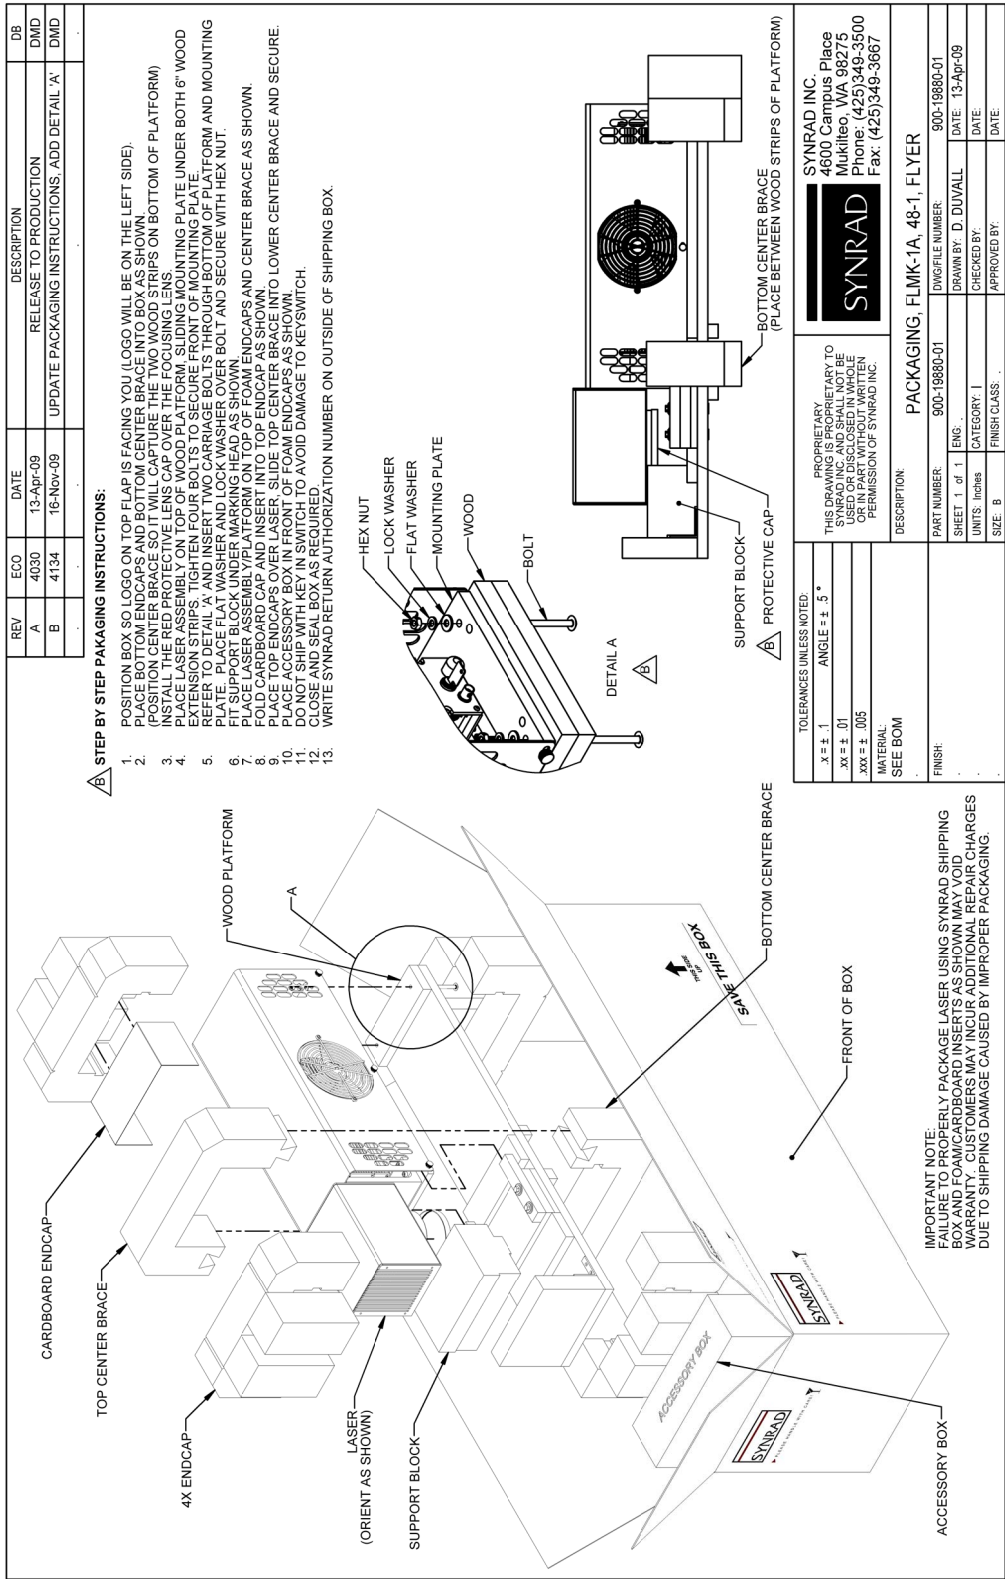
FLMK-1A (10W fan shroud) packaging instructions.
